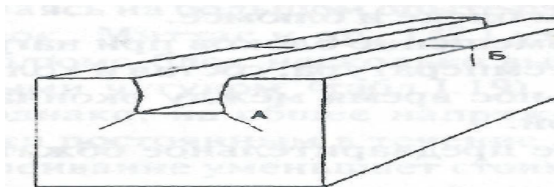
Defects in cathode blocks – cracks in the walls (a) and angular cracks (b)
